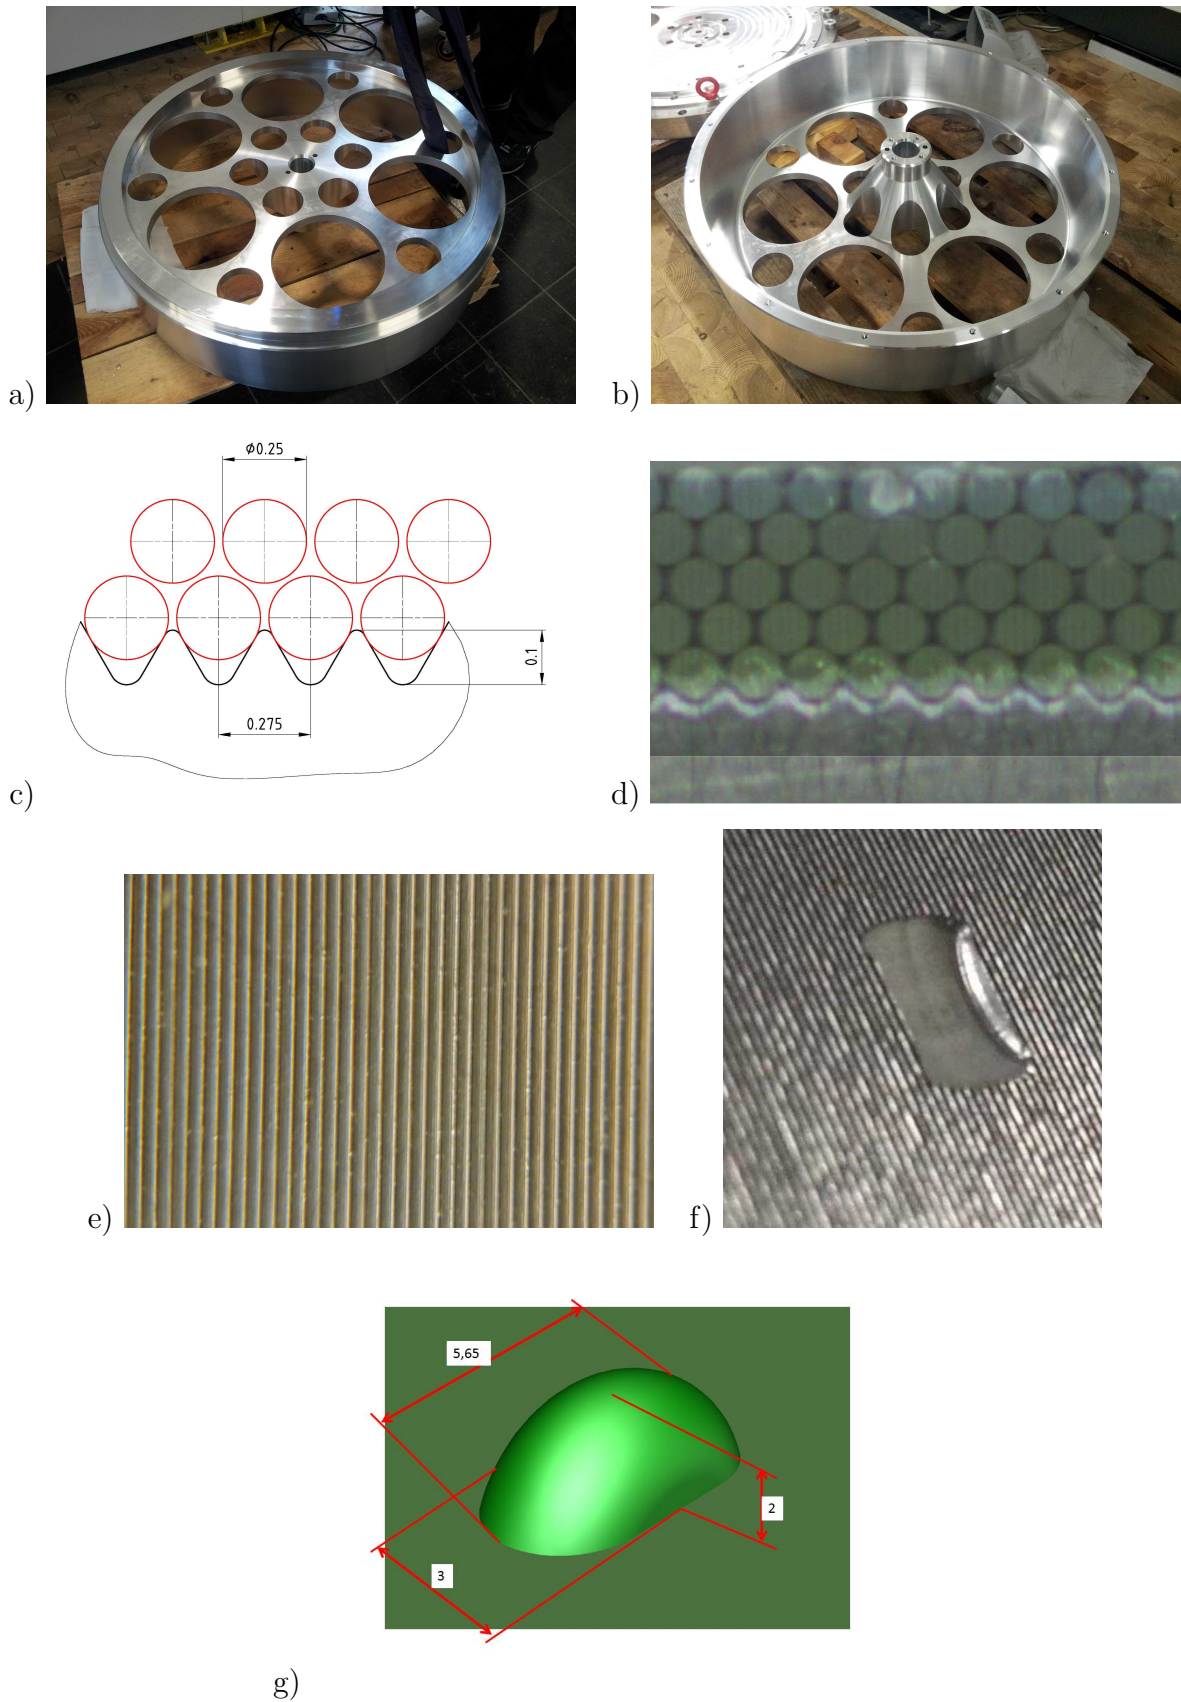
a) and b) winding wheel, c) schematic profile of winding grooves, d) visible produced profile of winding grooves and fibre windings on wheel, e) zoomed photo of winding grooves, f) zoomed view of milled alignment pin-hole in groove, g) drawing of resulting alignment pin after winding on wheel with alignment pin-holes in groove.
